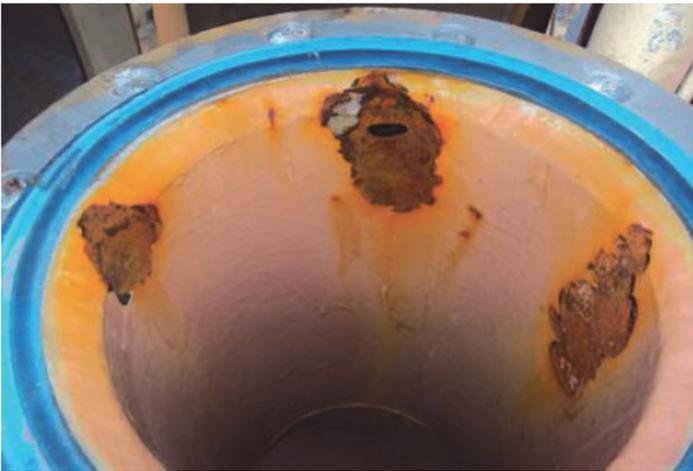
Corrosion around welded parts between distance piece and flange
